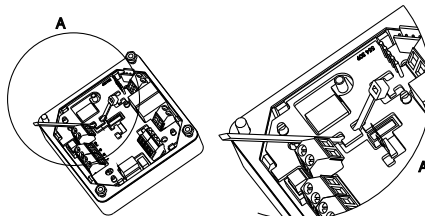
Using the cable clips on versions without EN 175301-803 plug
